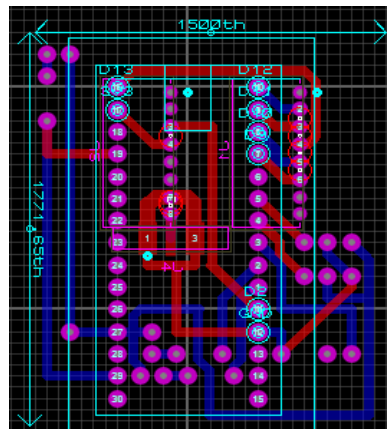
Double-sided PCB design of Smart Safety Helmet
